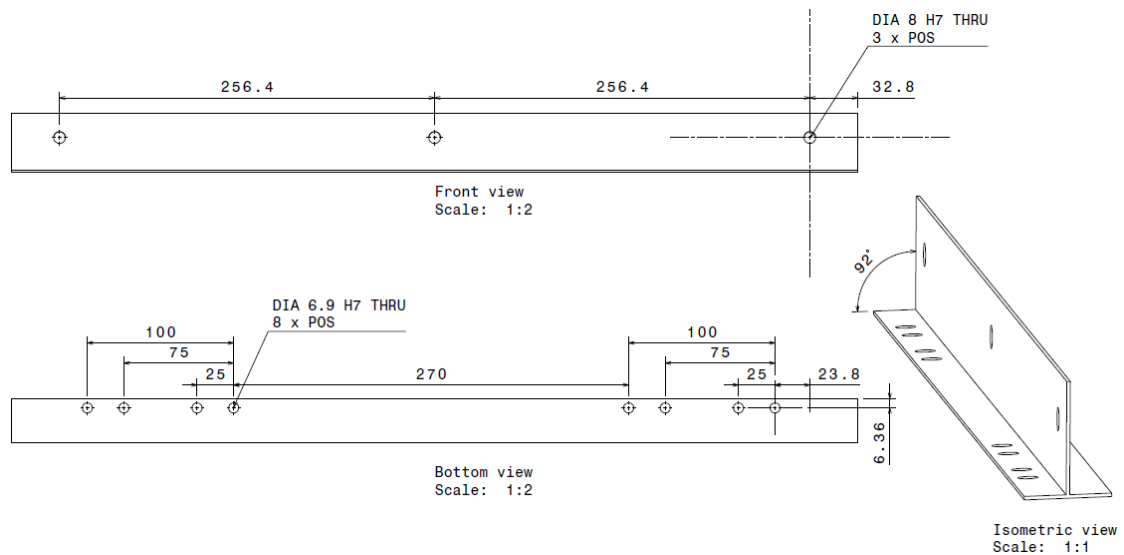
T-cleat drawing extract - dimensions referenced to key assembly features that are also used during alignment to bonding fixture and dimensional verification. The purpose of the design was to enable direct datum flow chain transfer between high accuracy laser tracker network, tooling and assembly components.
